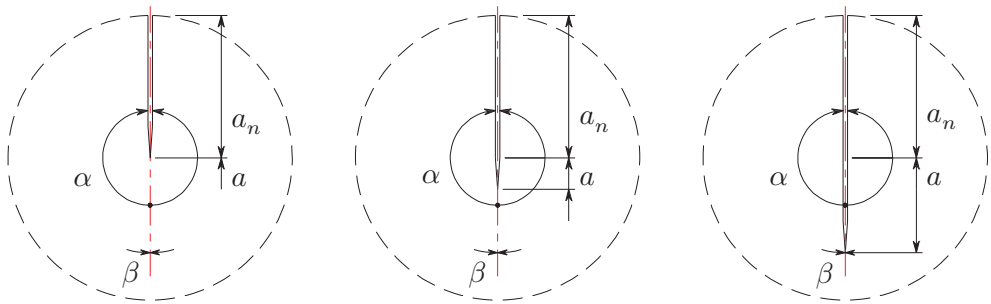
The weld root notch- and crack governing axis is one and the same.
